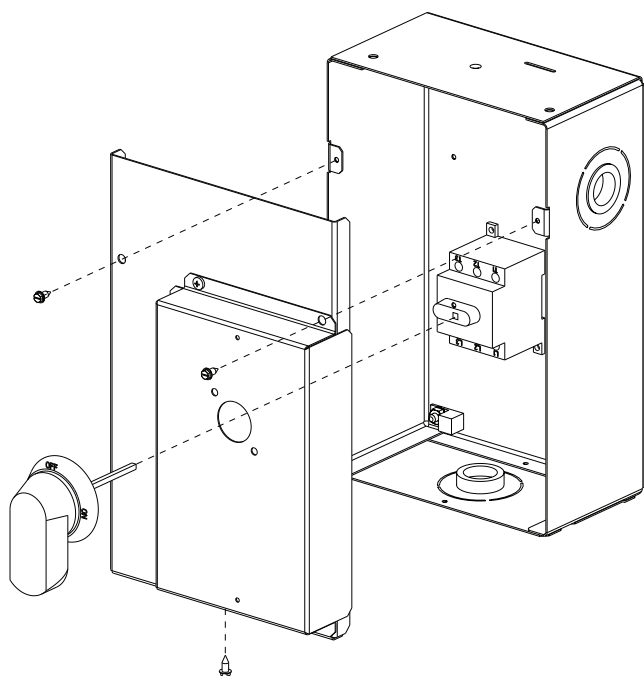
48WE*H08/12 Handle and Shaft Assembly for NFD
